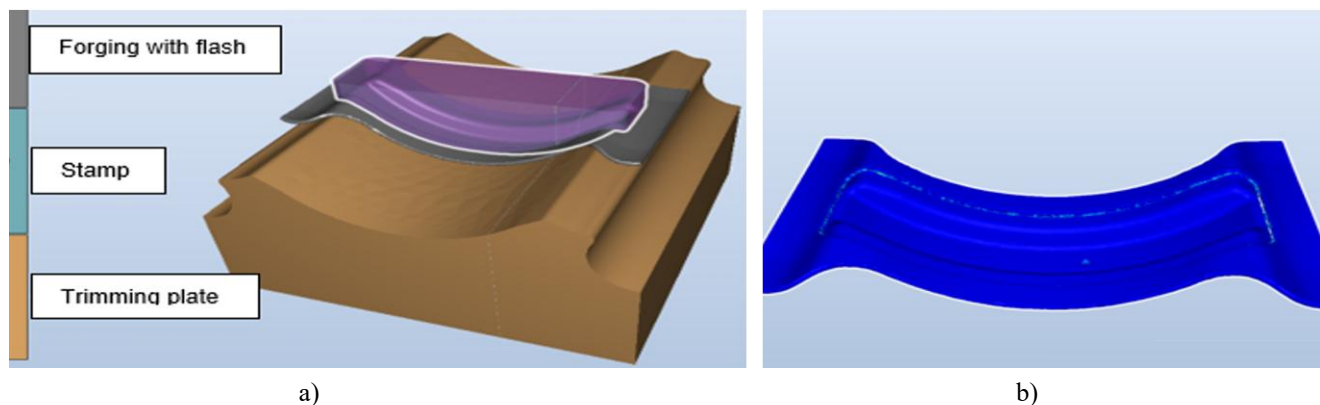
FE numerical results: a) tool setup for cutting the part, b) forged part.
